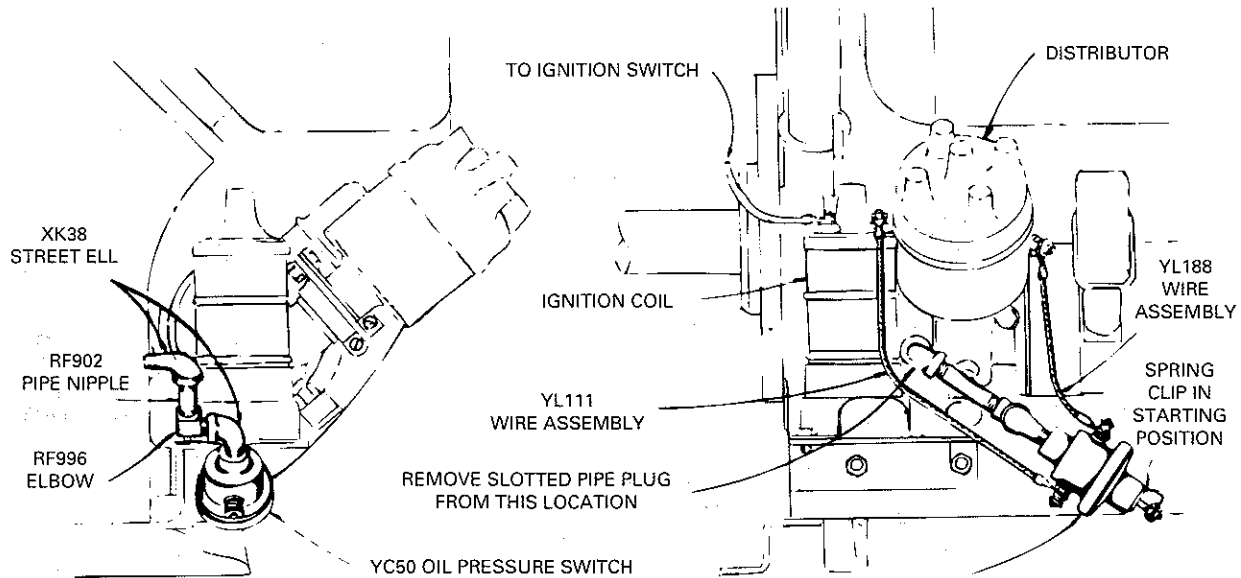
Oil pressure switch mounting, with battery ignition, distributor
